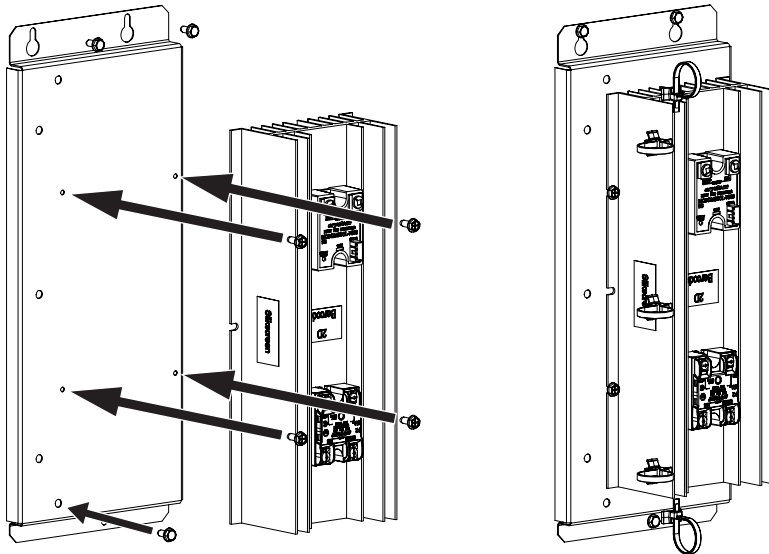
D cabinet – SCR heatsink assembly (install to bracket)
